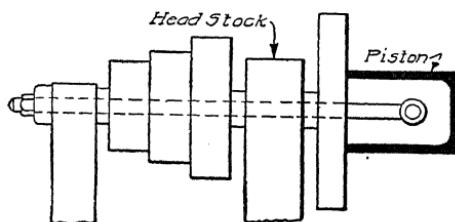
Rigging for Holding Piston against Face Plate of Lathe
